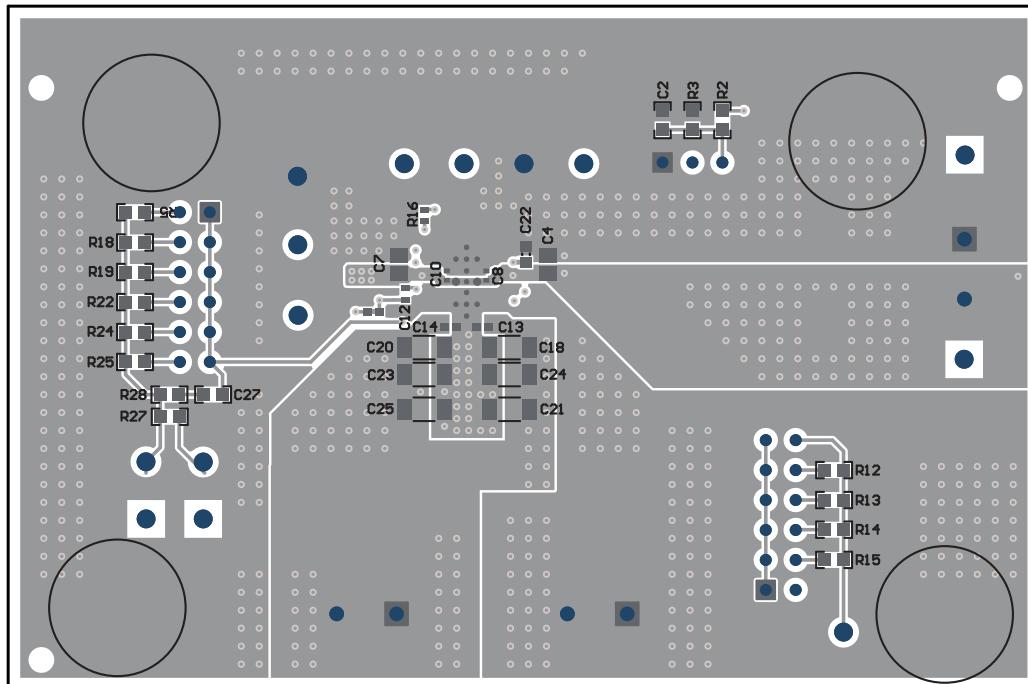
TPSM8A29EVM Bottom Layer Composite View
